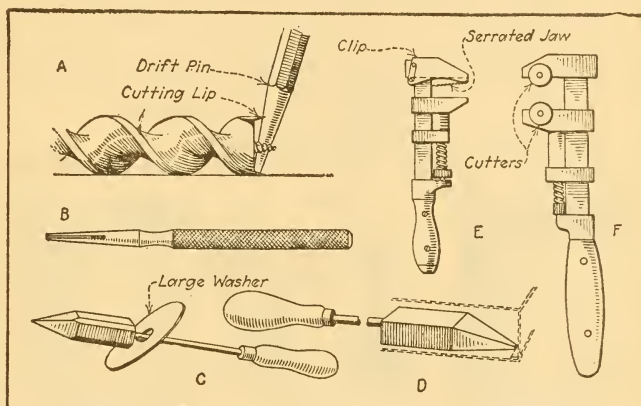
A—How to Repair Wood Bit. B—Screw Holder. C—Keeping Hot Soldering Iron Away From Bench Top. D—Special Shape Iron for Flat Work. E—Jaw to Make Pipe Wrench Out of Monkey Wrench. F—Converting Wrench to Pipe Cutter.
